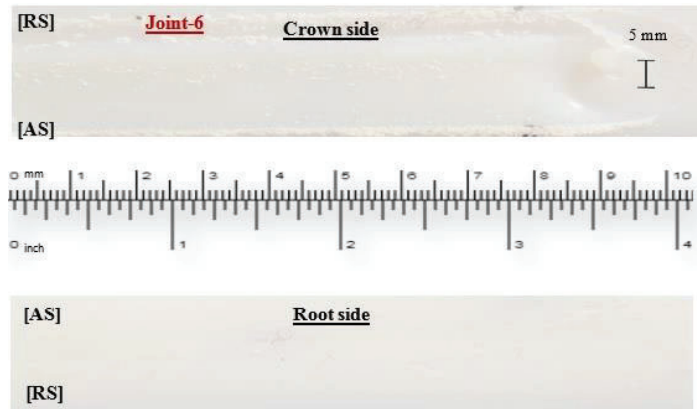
Joint-6 material flow, surface finish, and surface defects
